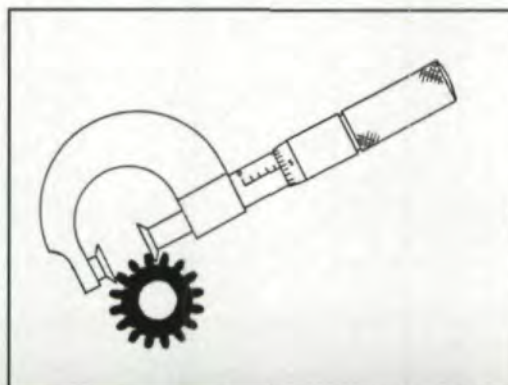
Flange micrometer measuring the span over 3 teeth on a 16-tooth spur gear.
